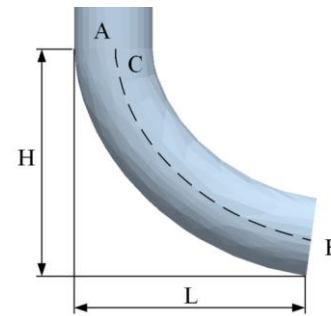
Section of the Brachistochrone of seed-guiding tube
